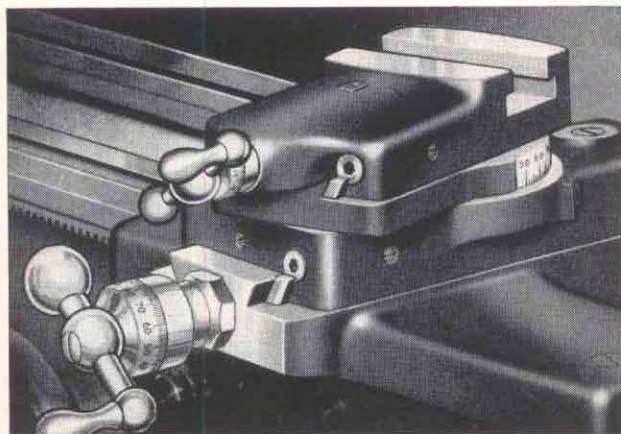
Close-up Showing Adjustable Tapered Gibs Used on Compound Rest Base and Top Dovetails of 10"-1" Collet and larger South Bend Lathes
